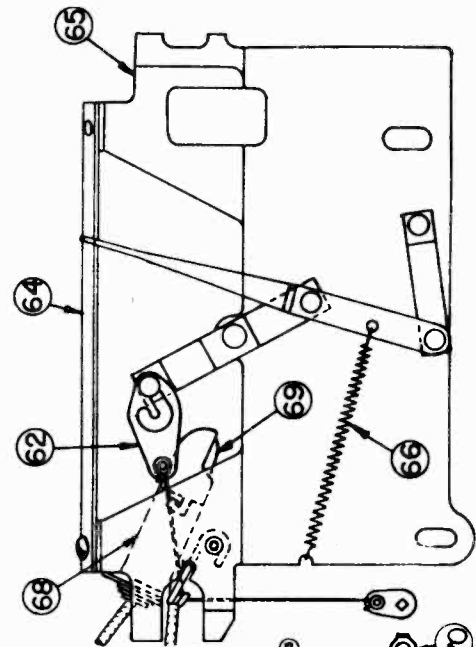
PARTS LAYOUT POINTLE PLATE ASSEMBLY
